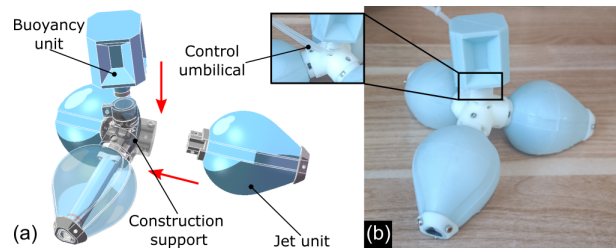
a) JSR (jet soft robot) assembly process; and the b) real products.
